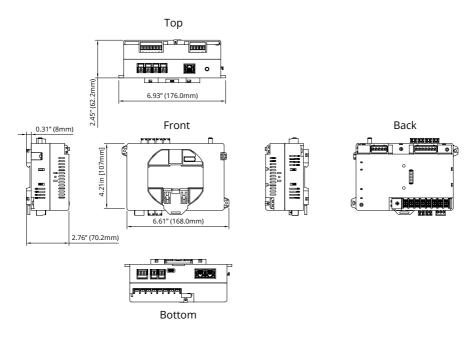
Acuvim 3 DIN Rail Mount Appearance and Dimensions
